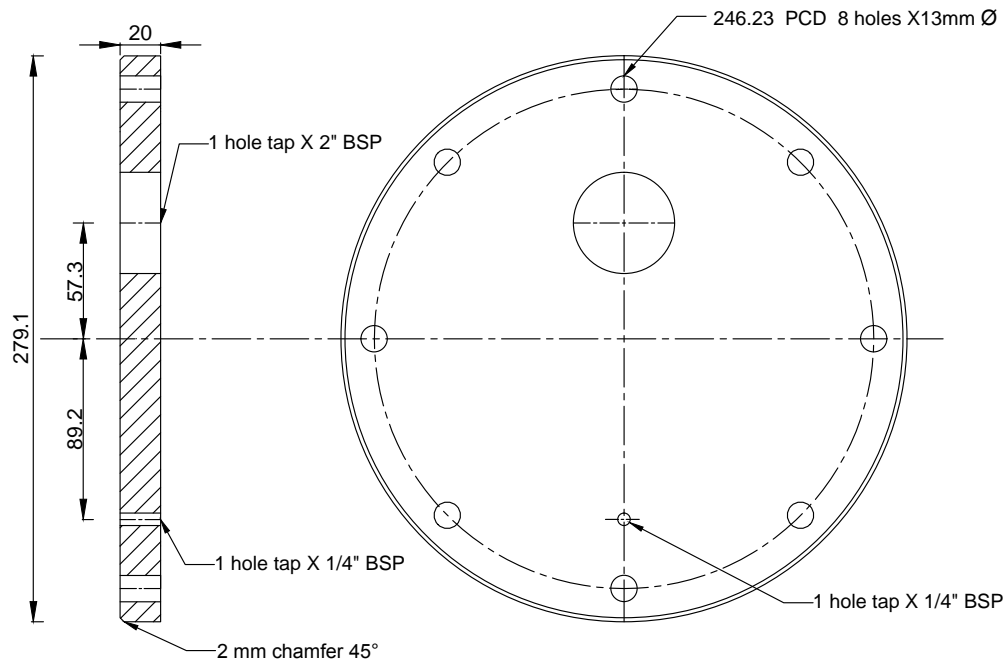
Schematic diagram of the end plate flange and its dimensions.
